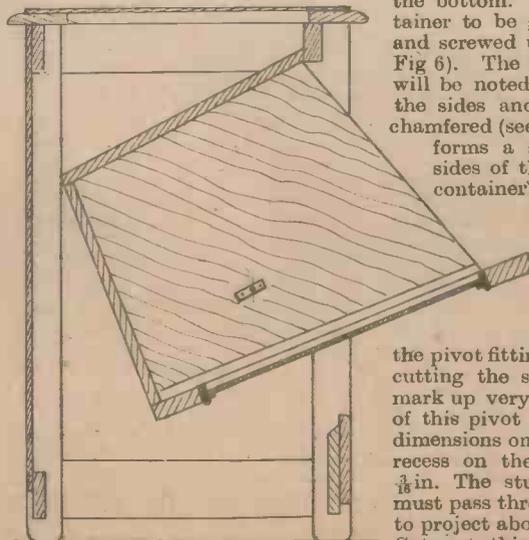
A similar detail, but showing the door open and the container ready to use.
